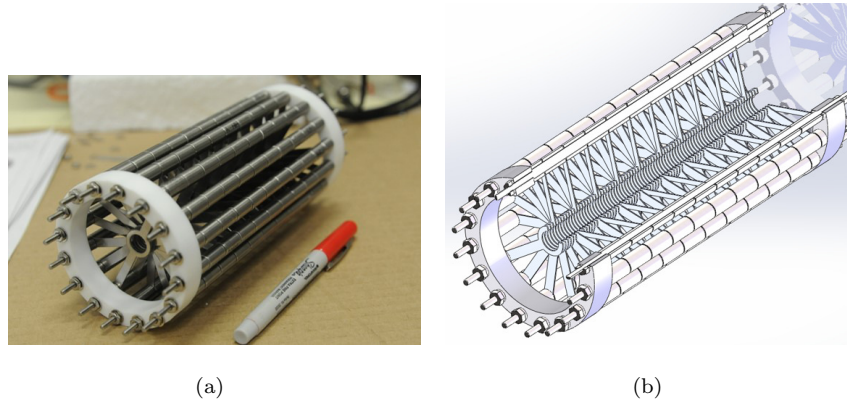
The tested prototype Ion Conveyor a) a photograph and b) CAD drawing with a quarter removed to show the inside.
